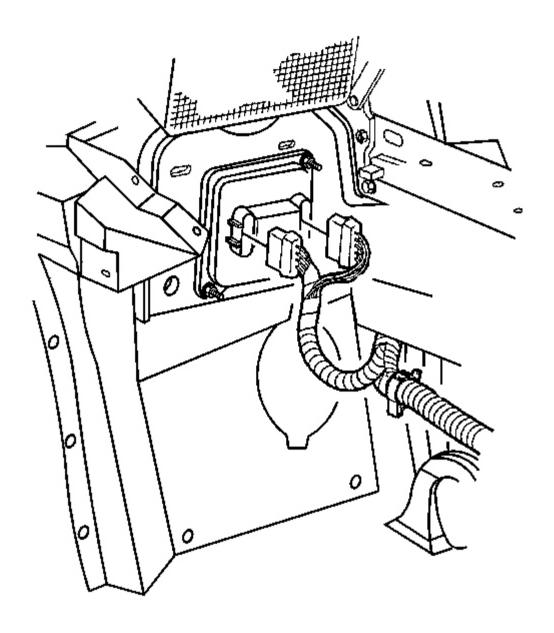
Electrical Connectors To Headlamp Control Module Courtesy of GENERAL MOTORS CORP.
